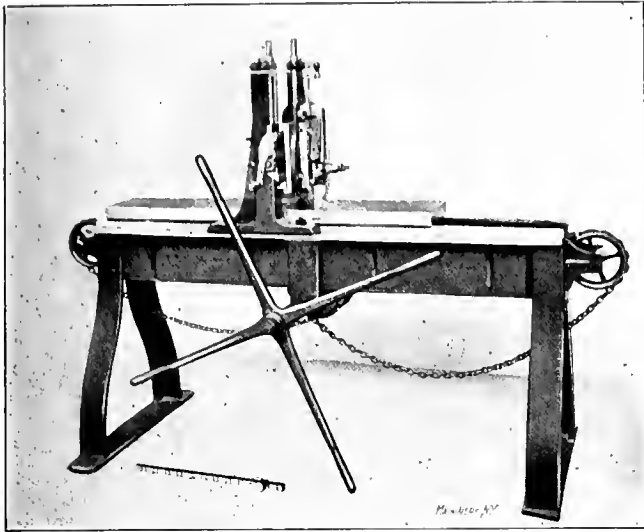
Roberts Planing Machine, Table 52 inches Long by 11 inches Wide (1817), South Kensington Museum
